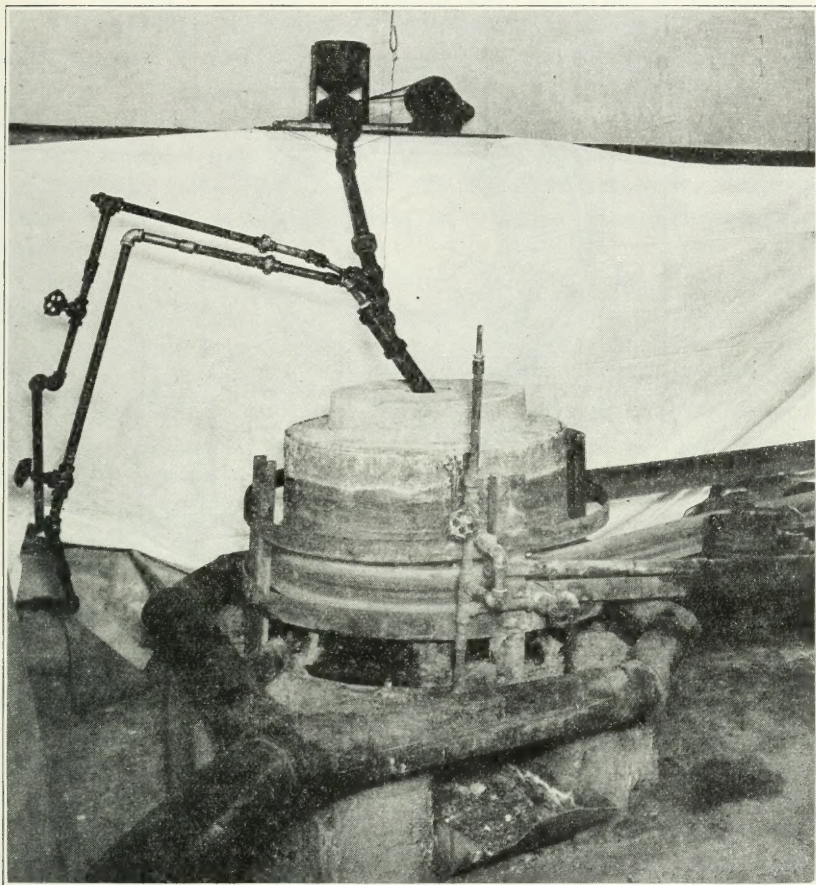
VIEW OF SLAGGING TEST FURNACE AND DRIVING MECHANISM
